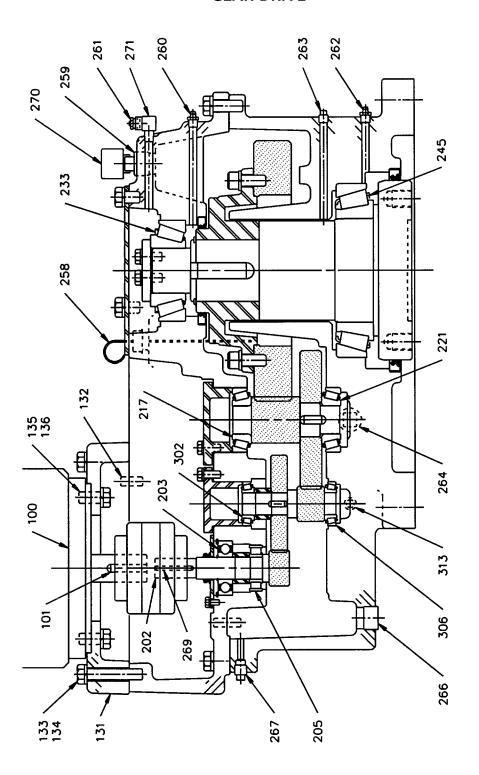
GT Triple Reduction Gear Drive, Size 3,4
